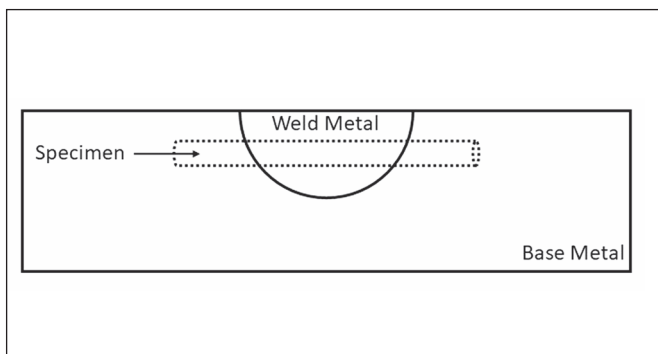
A schematic representing the cross section of the autogenous GTAW weld plates showing the location of Gleeble sample removal.
